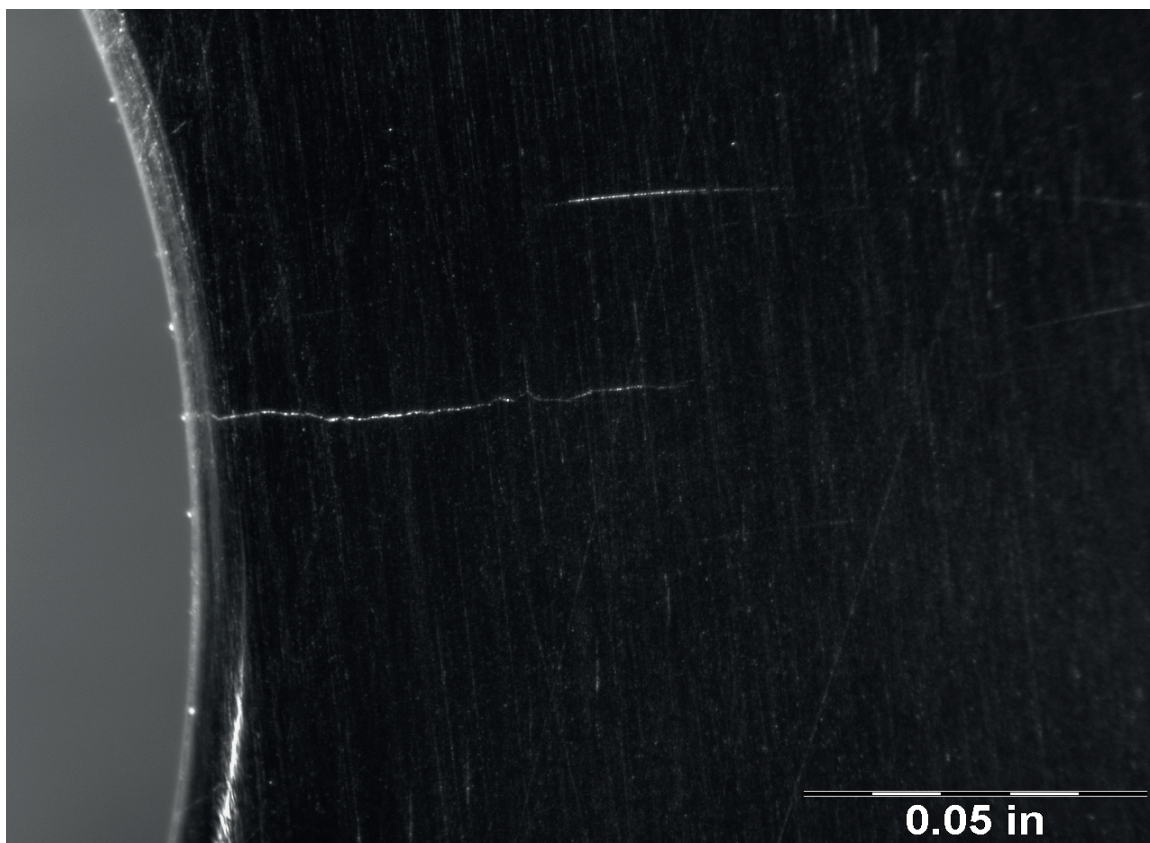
Image of Surface Crack in Coupon Cx4N1-01-D, Surface Crack Length is 0.0793 inch.
